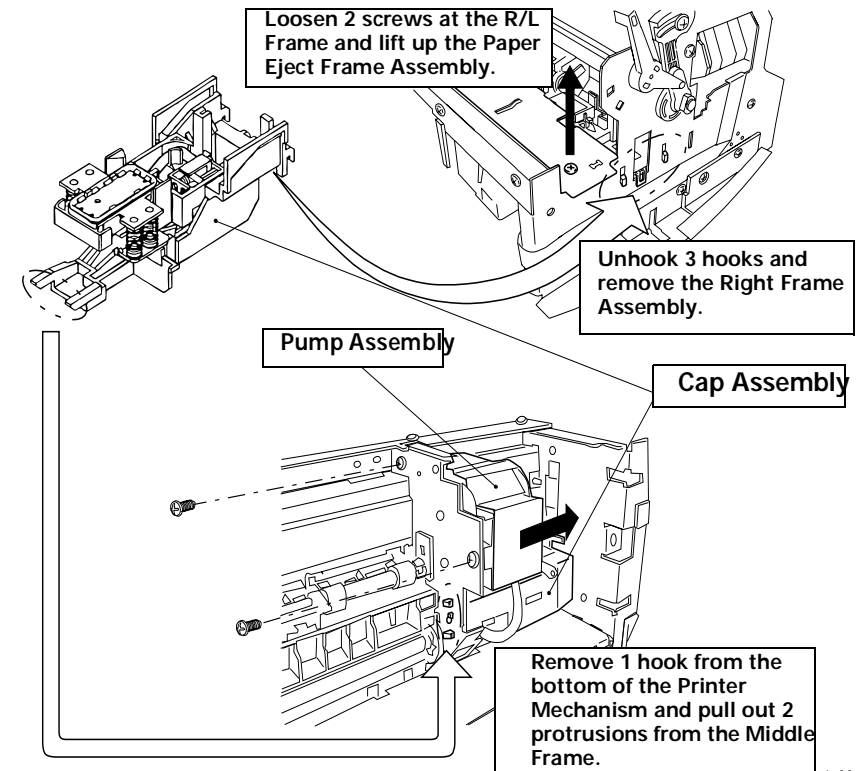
Cap Assembly and Pump Assembly Removal da09
